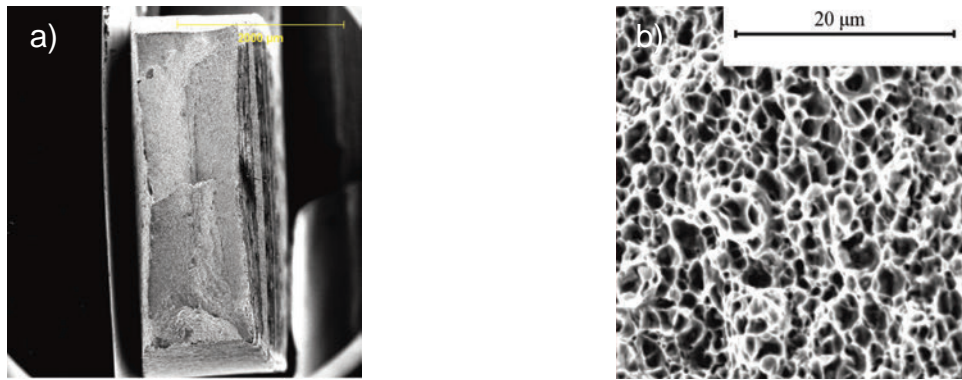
Fracture area of Ck55 steel after tensile test: after the 1st pass – perpendicular sample, macrograph (a); detail (b)
